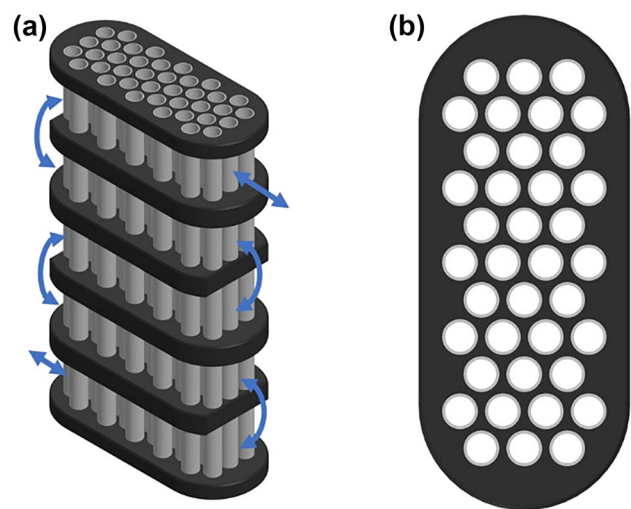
The regenerator design with shell-and-tube geometry (without housing) with marked HTF flow path (a), and the top view of the design showing staggered tube arrangement (b)
